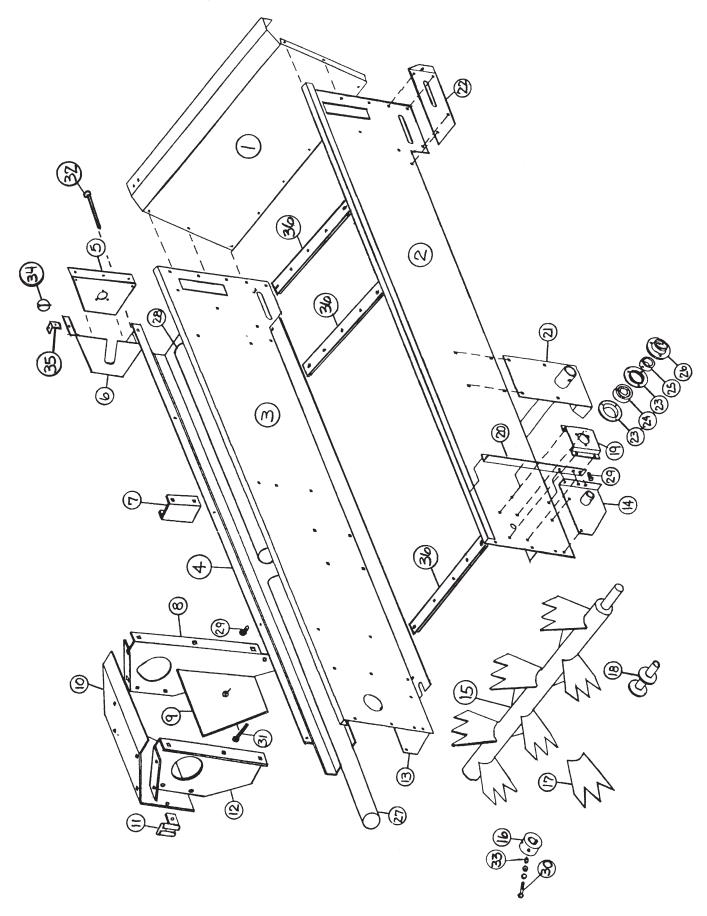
MODEL 80 FRAME, BEATER & SHIELDS
